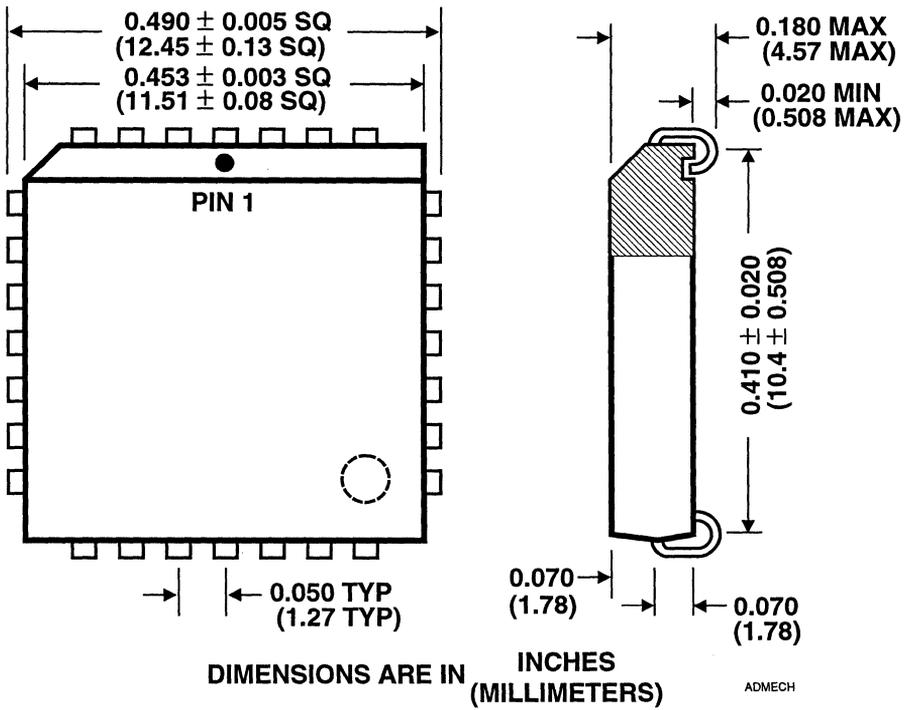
28-pin PLCC Mechanical Dimensions
